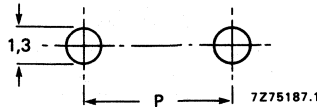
Trimmer pin holes, for P dimensions see selection chart.
